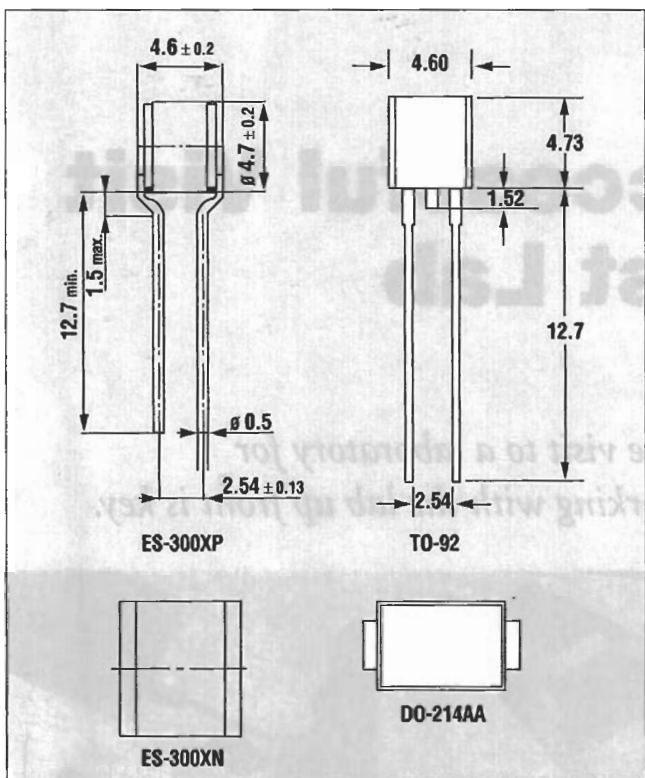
A comparison of the soldering-pad dimensions of leaded and surface-mount gas discharge tubes to the TO-92 and TO-220 SIDACtors. Although taller, the ES-series XN GDT fits exactly into the TO-220 pad dimensions. Measurements are shown in millimeters (mm).
